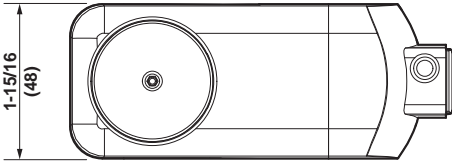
EN/ESZ3B2 and EN/ESZ3C2 Actuator Dimensions in Inches (Millimeters).
